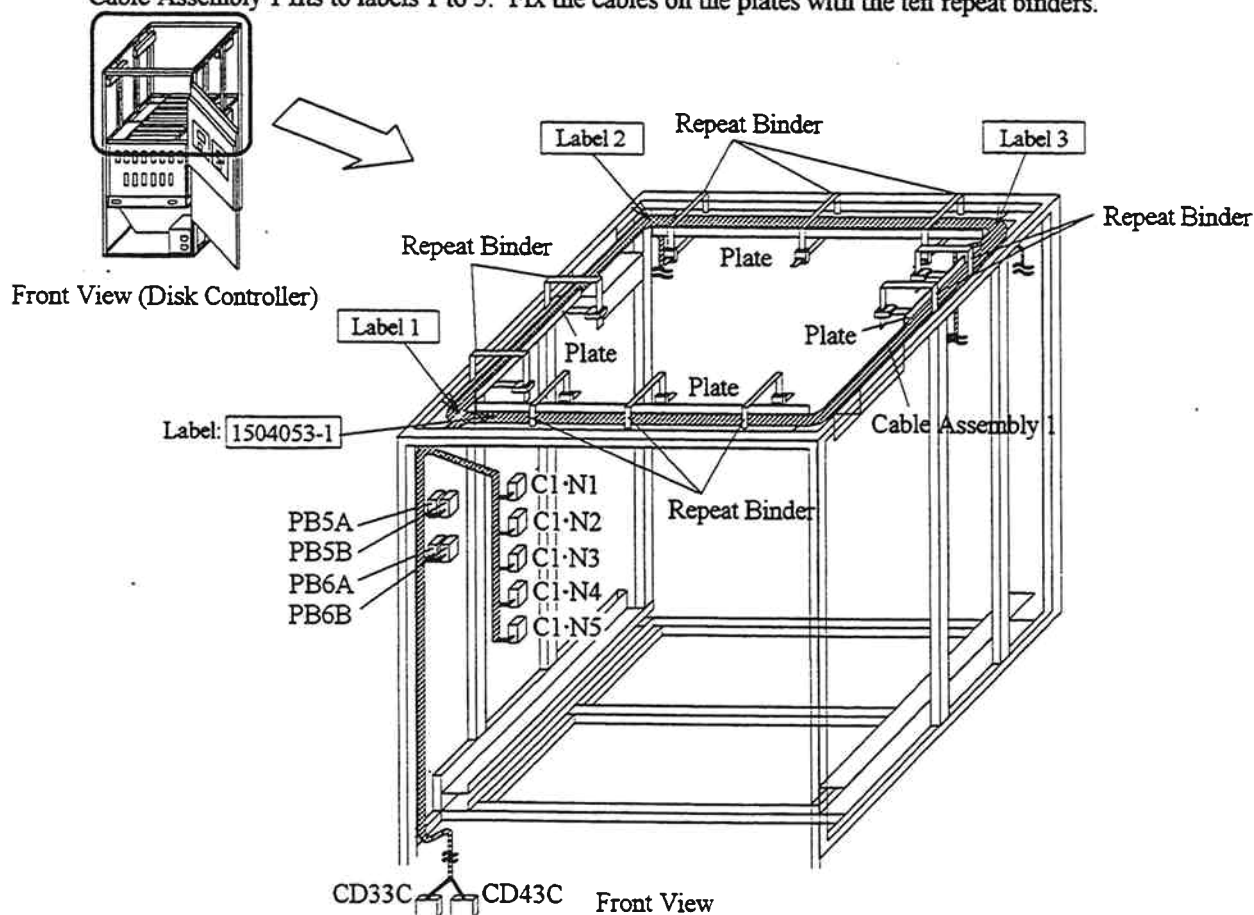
Attachment of the Cable Assembly 1
